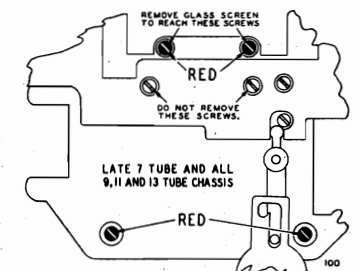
Location of 4 Red Mounting Screws in Late Models
